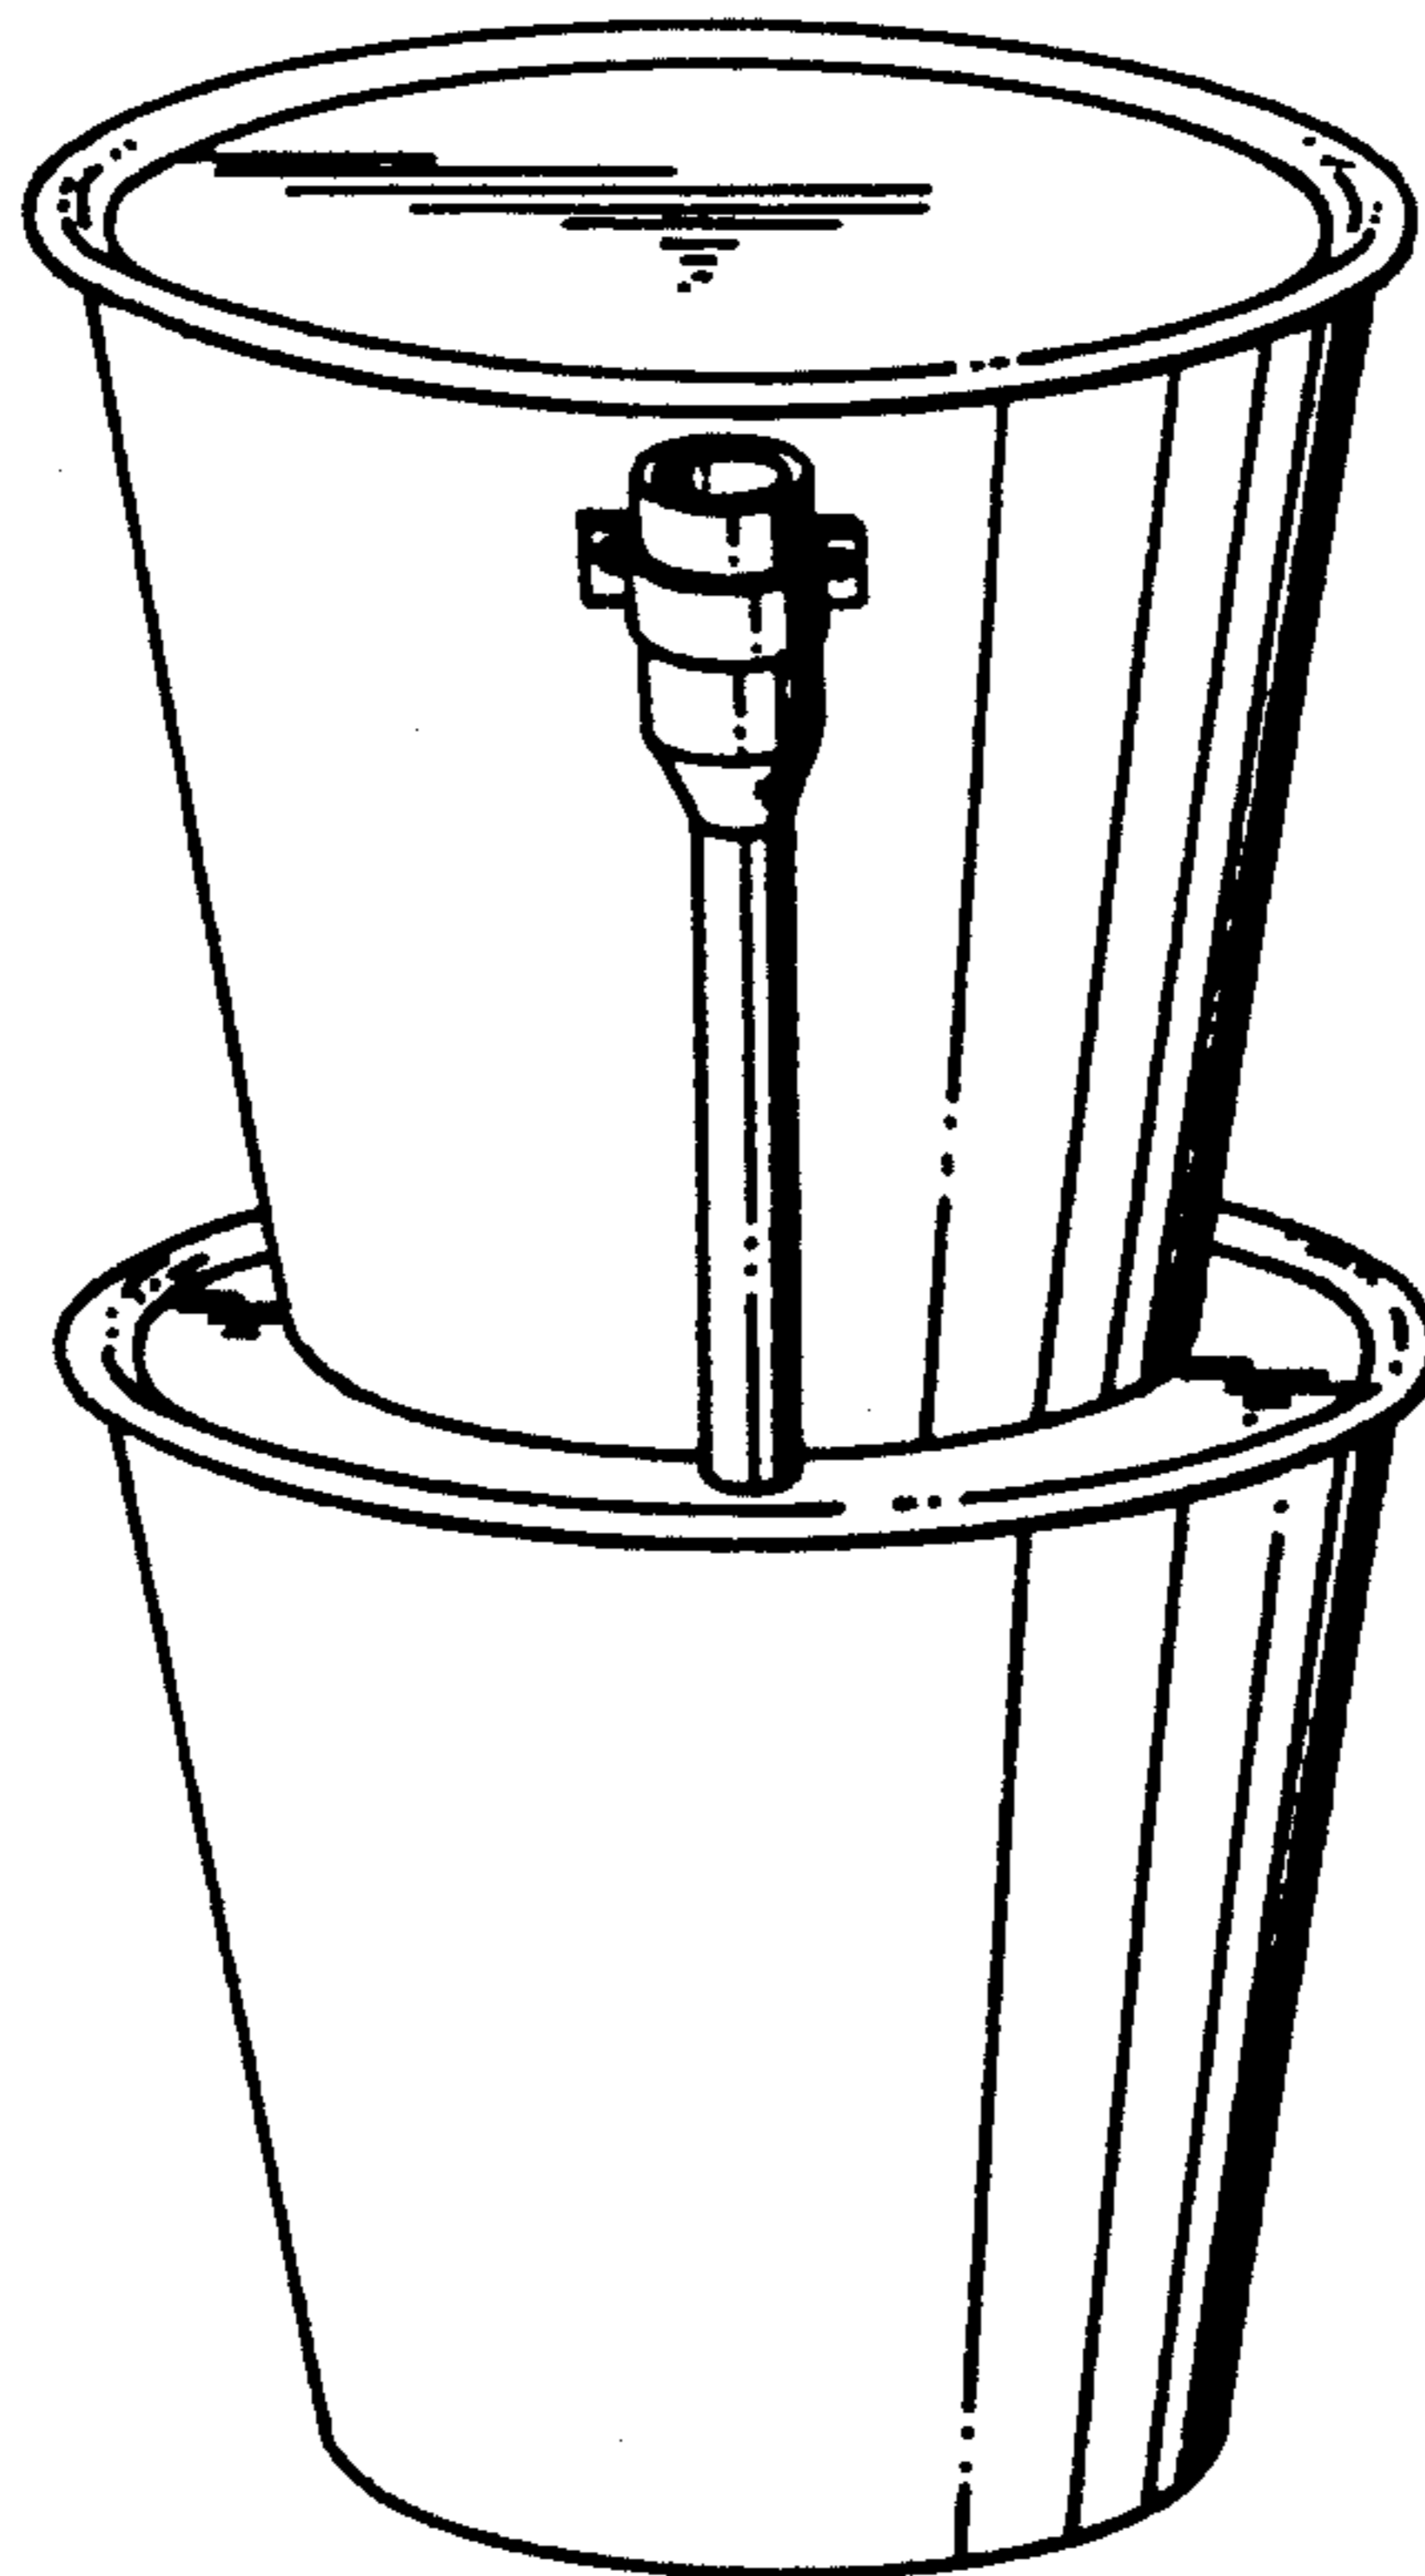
is a top perspective view of a vacuum filter for thick liquids showing my new design;
